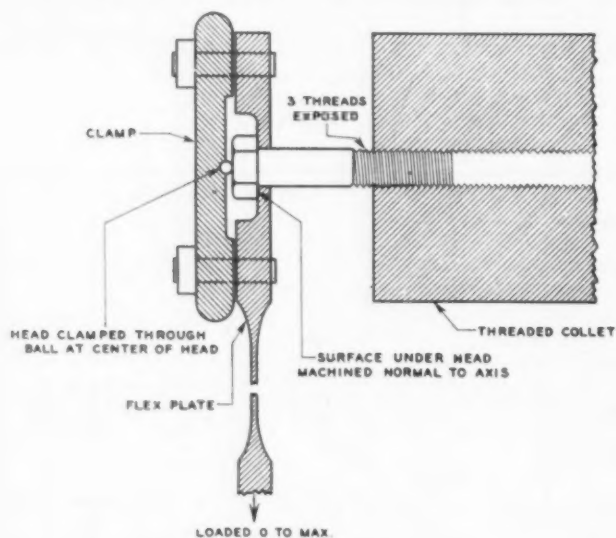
Fixture is part of testing machine in which bending fatigue tests were run. Surface under head bolt was machined perpendicular to longitudinal axis of bolt and held tightly by yoke applying pressure through hardened steel ball.
